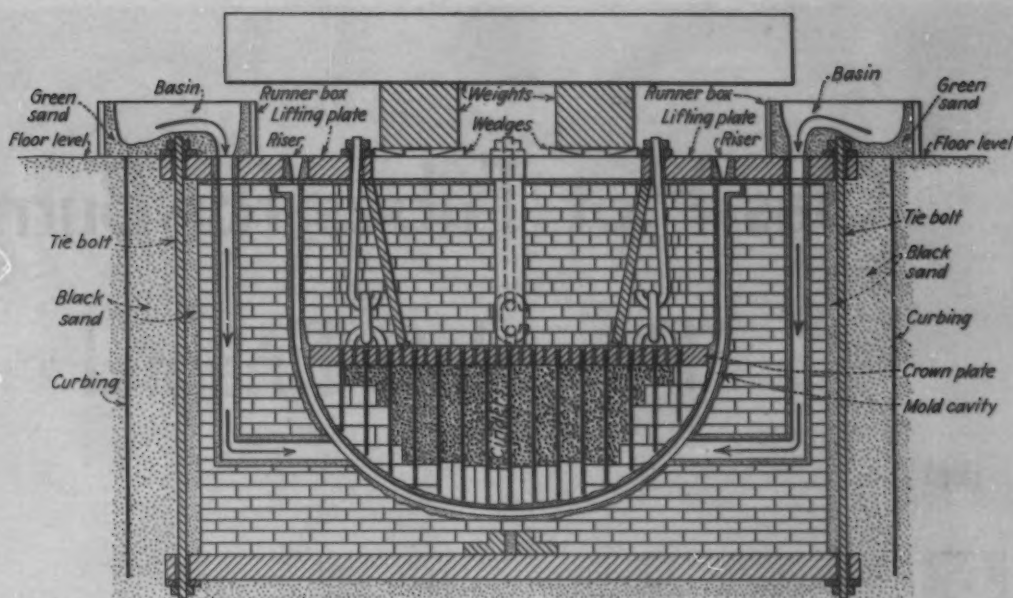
Cross section of kettle mold ready for lifting off the cope.
